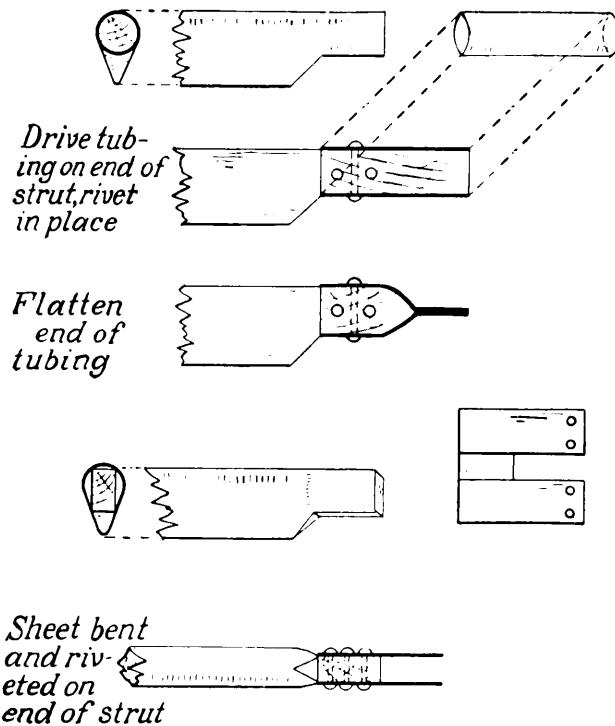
Strut and fittings. Examples of fittings which may be used for fastening the struts.
